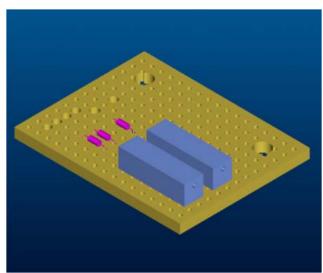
Bracket & PCB Board Assembly (View 3)
